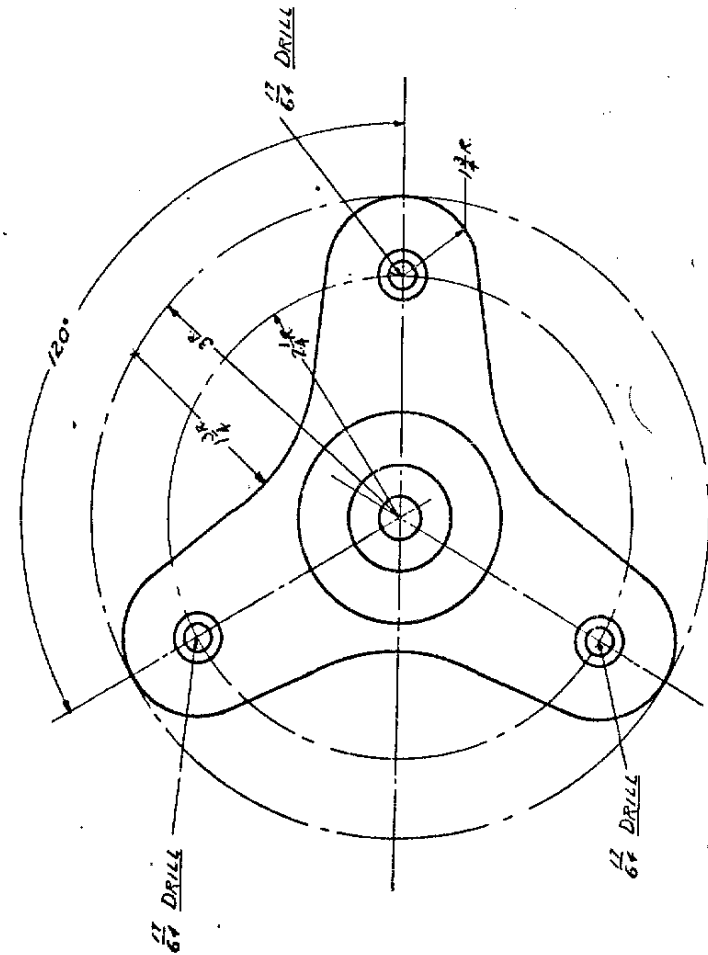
Positions of Holes for Mounting the Base Plate, Vehicle Roof.
